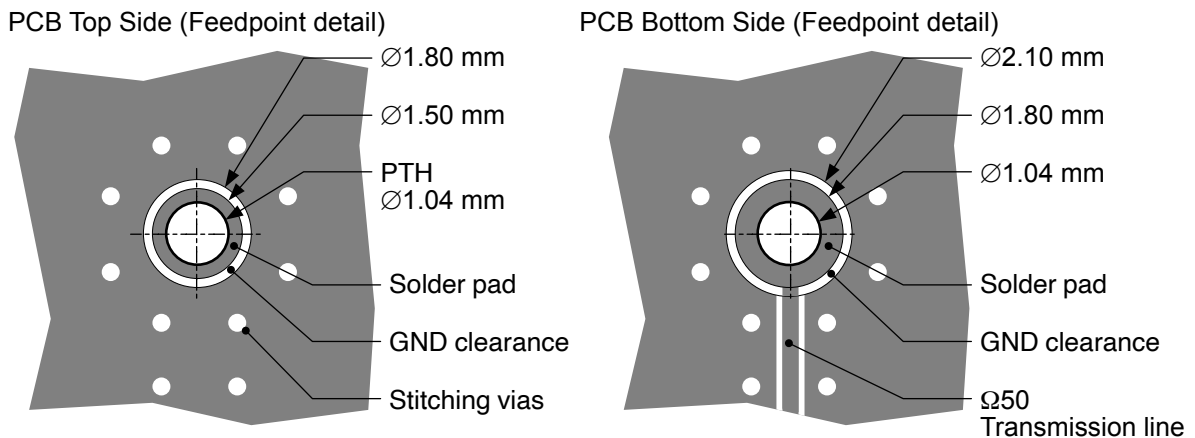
Recommended PCB Footprint for the AC33254-1T Antenna
